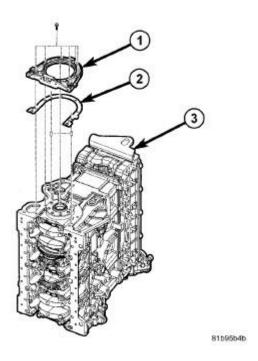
Rear Oil Seal Carrier, Rear Oil Seal Carrier And Gasket & Engine Block Courtesy of CHRYSLER LLC
